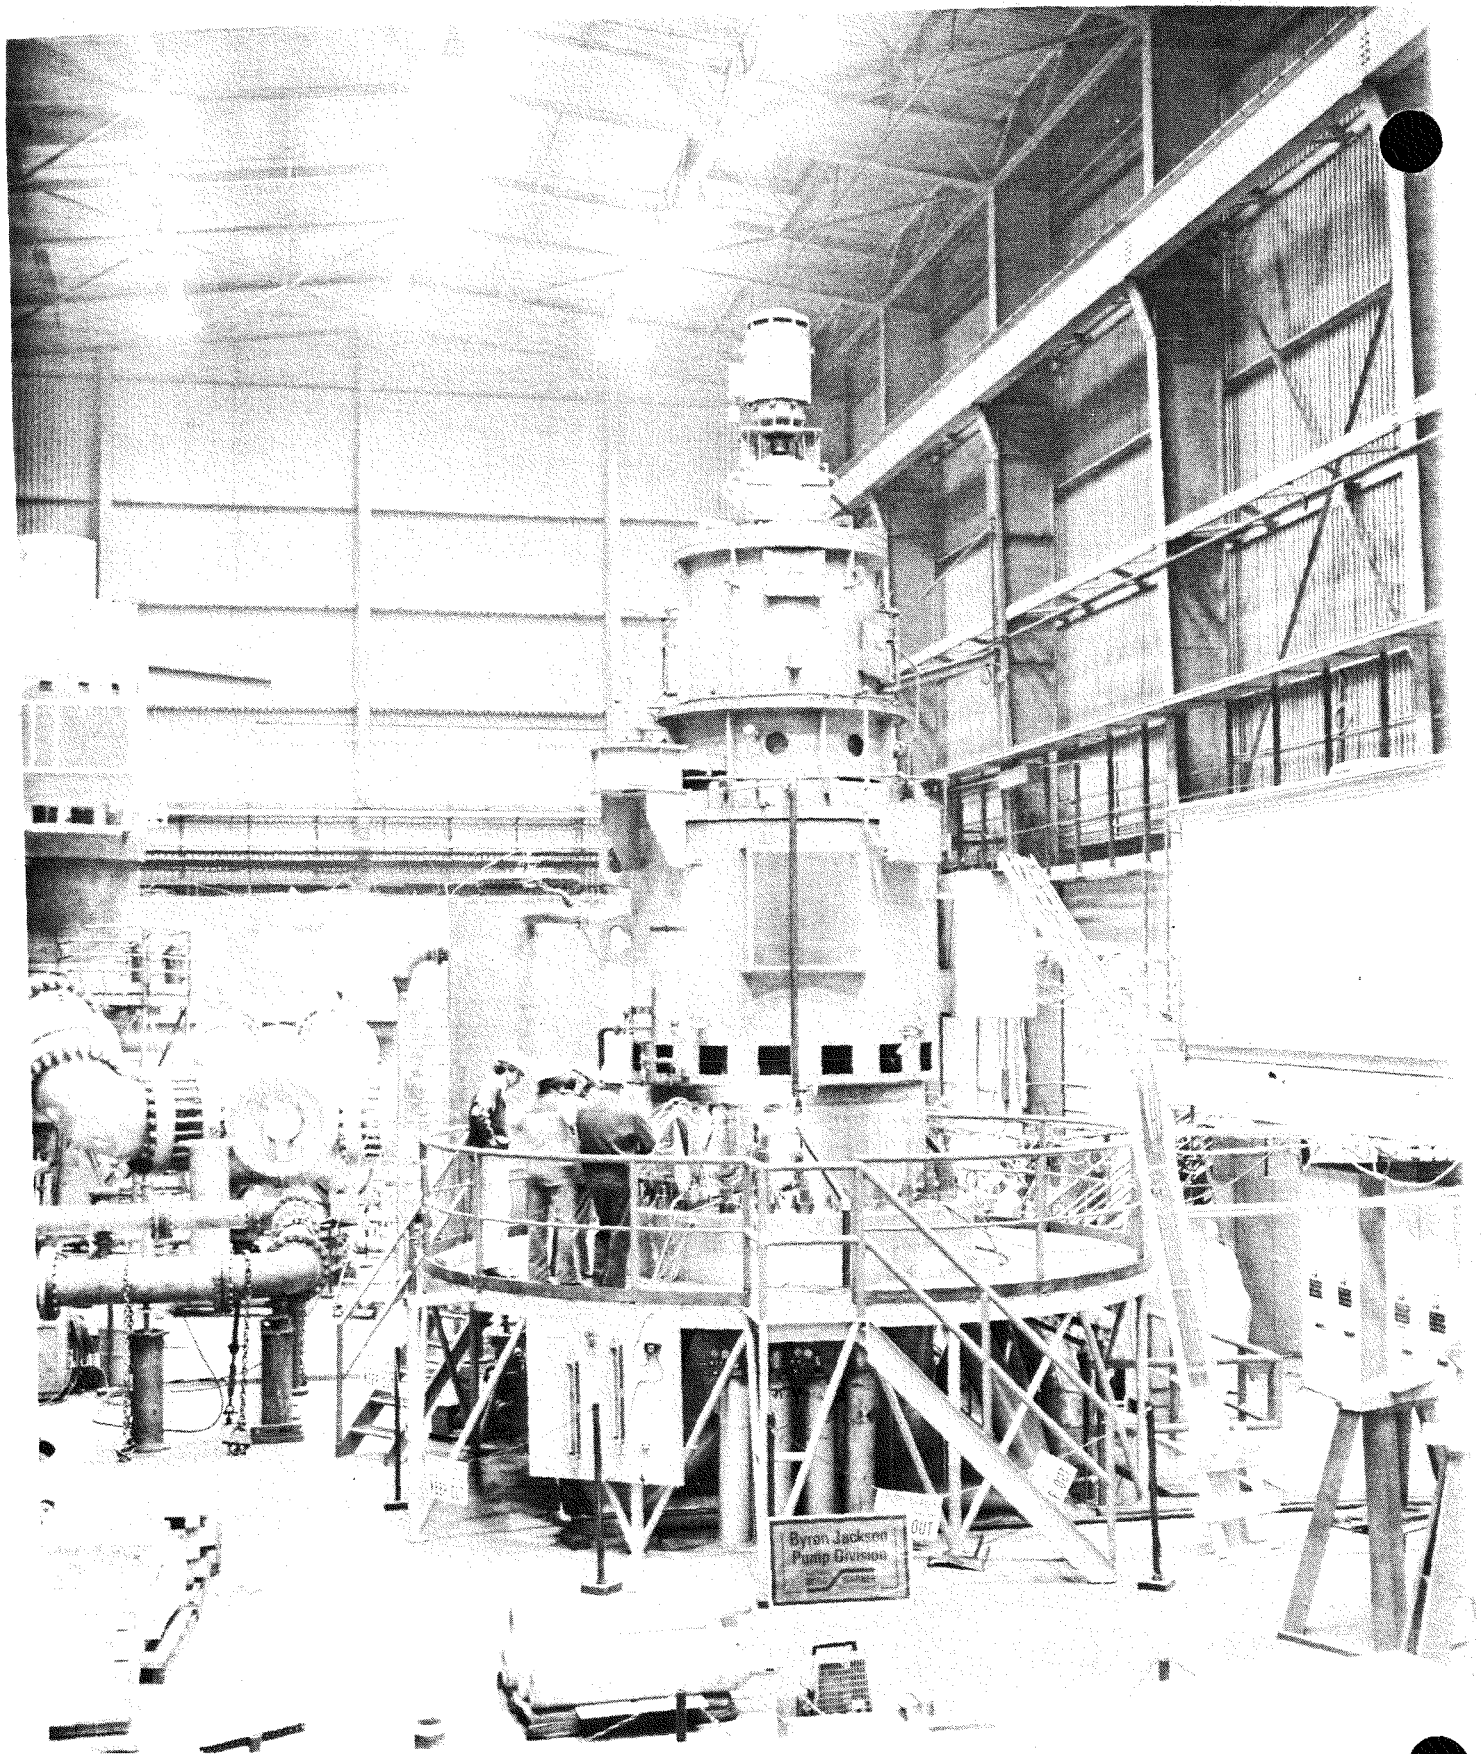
Prototype Sodium Pump Drive Motor At Byron Jackson
